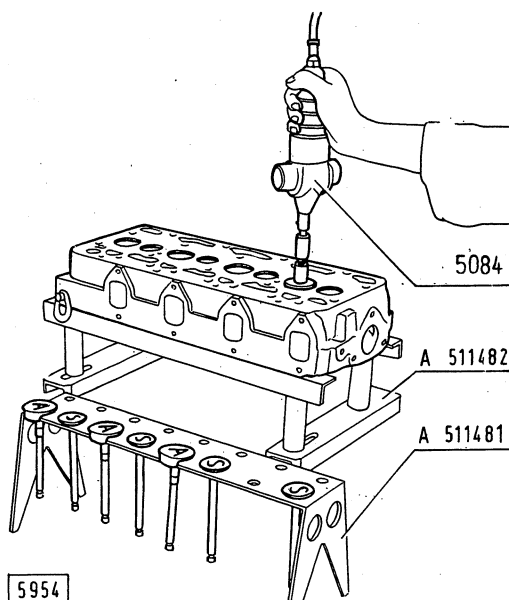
Grinding a valve with pneumatic grinder 5084.
